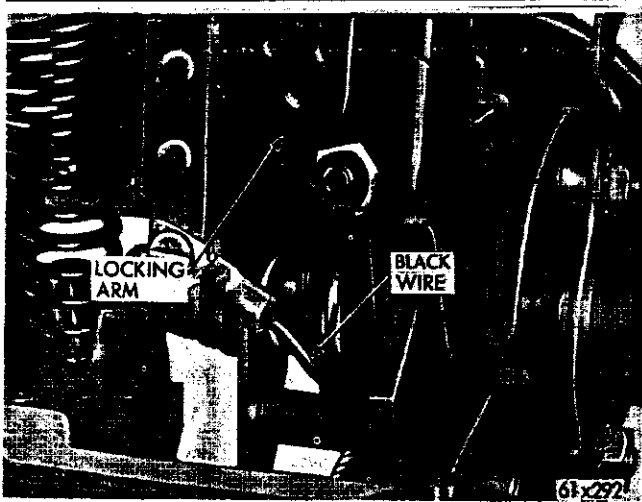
Remove the Black Wire From Locking Arm Magnetic Coil and Terminal 1
